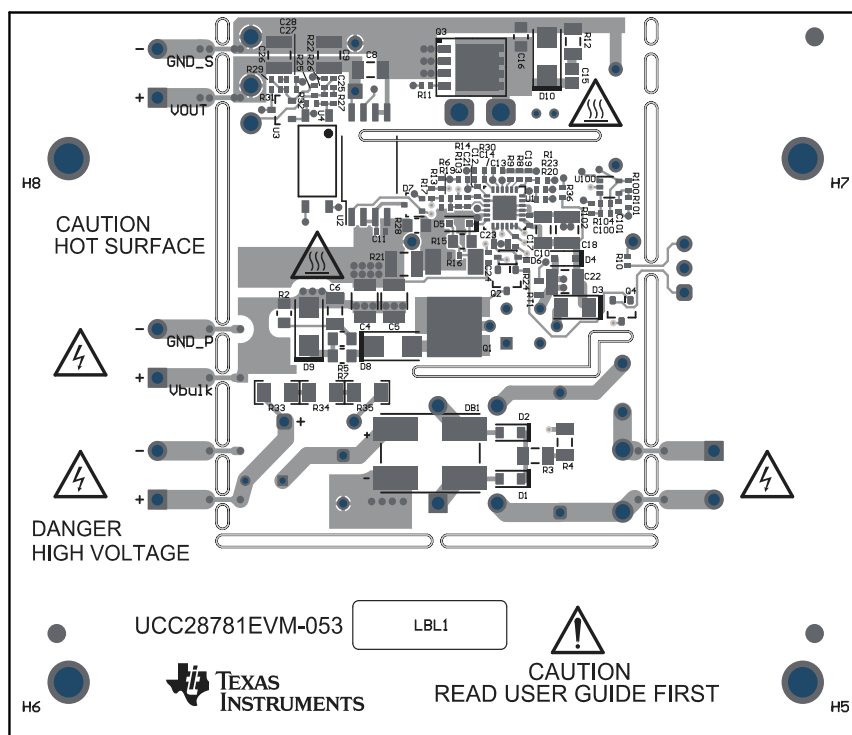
Bottom-Side Assembly and Bottom Layer of PCB
